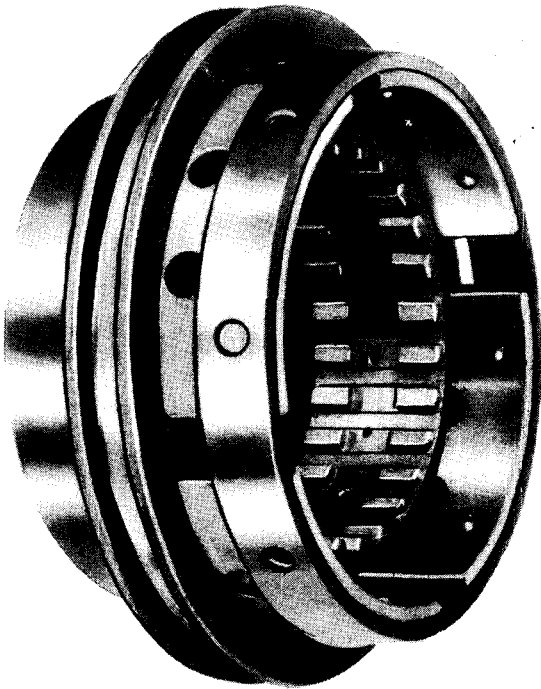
OUTPUT SHAFT ASSEMBLY
